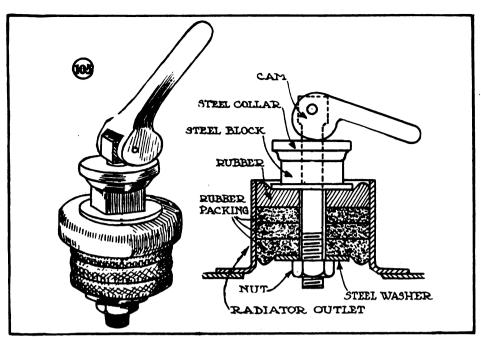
Rubber compression plug used for making tight joints at inlet and outlet pipes and filler cap. The left view shows the cam released and at the right is a sectional view with the cam down
